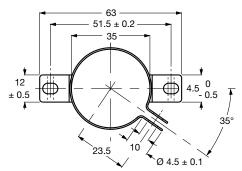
Dimensional outline of clamp for case Ø D = 35 mm
